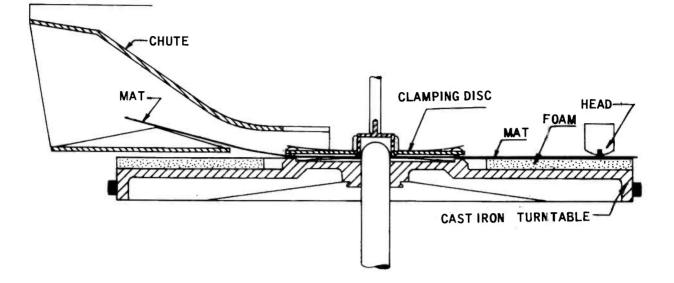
SECTIONAL VIEW SHOWING POSITION OF MAT AND HEAD IN PLAY MODE
